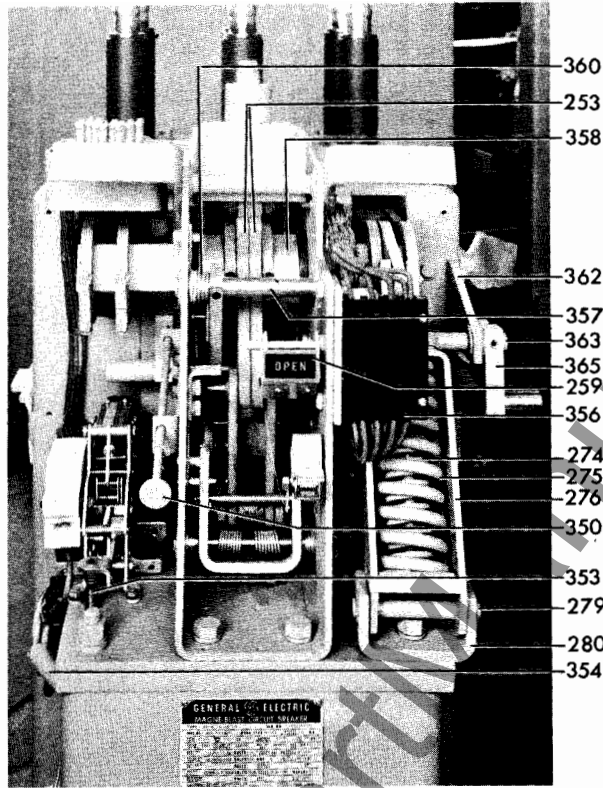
A MS-13 Mechanism - Front View (-4 Breaker)
